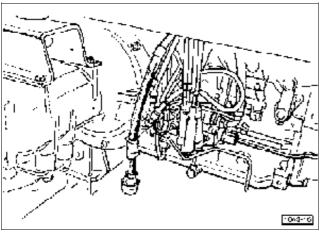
Position both the auxiliary spool valve bowden cables and the multiway socket wiring as illustrated, so as to avoid snagging or entanglement when lifting the cab.
